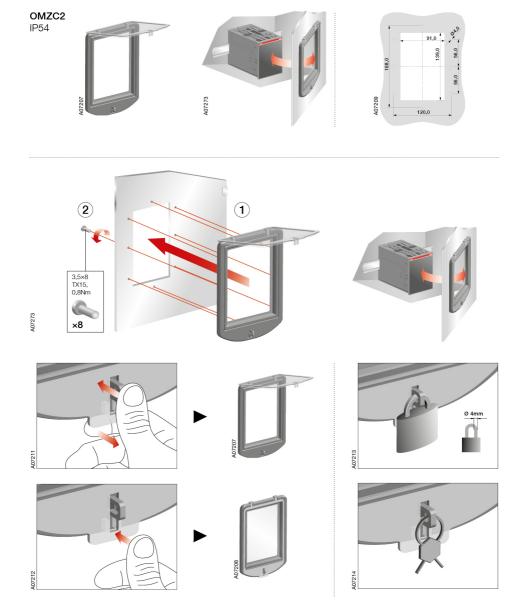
Door drilling and mounting of the cover plate OMZC2 , when the automatic control unit OMD800 is mounted on the DIN-rail
